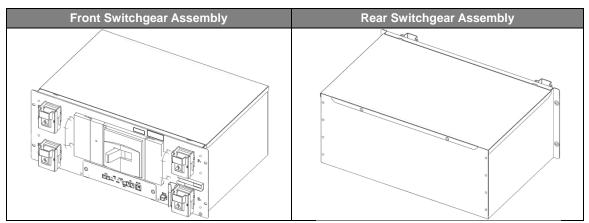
Front and Rear Views of the Switchgear Assembly
